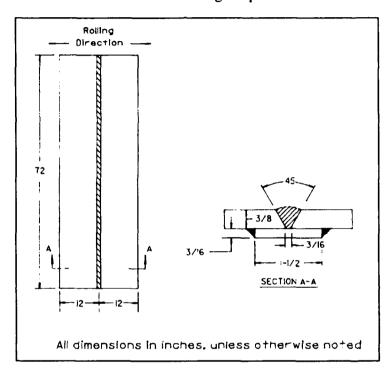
Wet Welded Fatigue Test Plate WW-PL1 and WW-PL2
